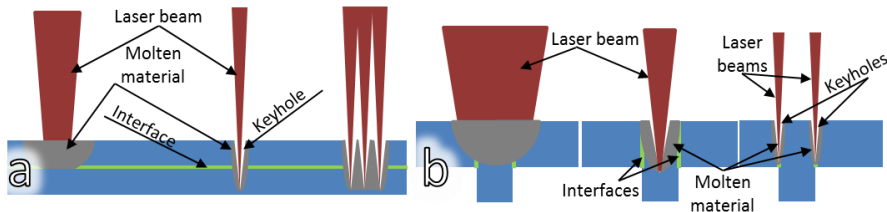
Difference between laser surface conductive welding (wide beam), laser keyhole welding with one beam (single narrow beam) and multiple simultaneous beams (multiple narrow beams): a) for overlap joints, b) for double butt joints.
